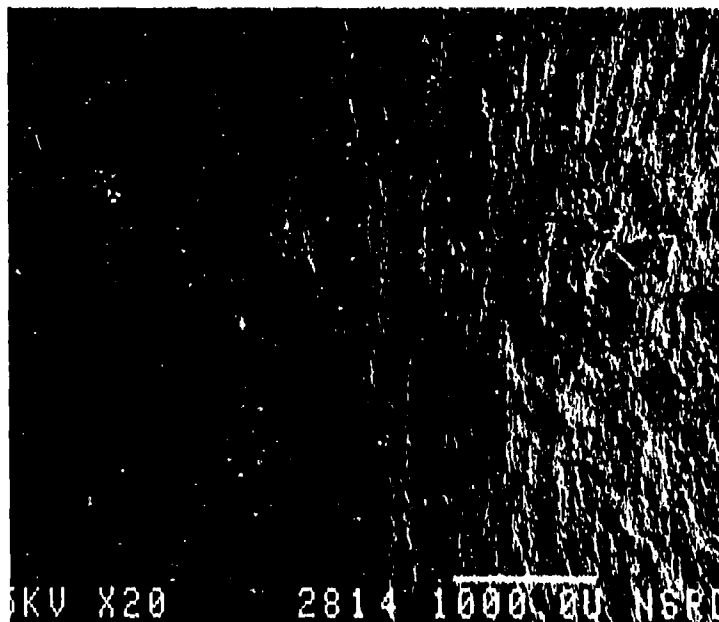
Scanning electron photomicrographs of matching transverse fracture surfaces of tensile specimen GCN-160 tested at  $-130^{\circ}\text{C}$  showing three longitudinal cracks which meet at the center of the specimen (10X).
